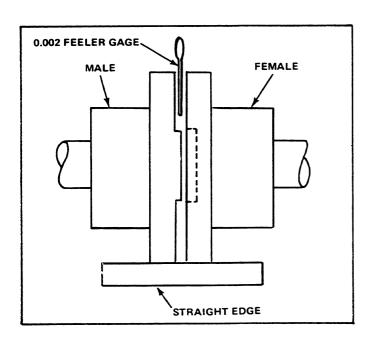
Checking Alignment (Parallelism) of Coupling and Propeller Flanges.
